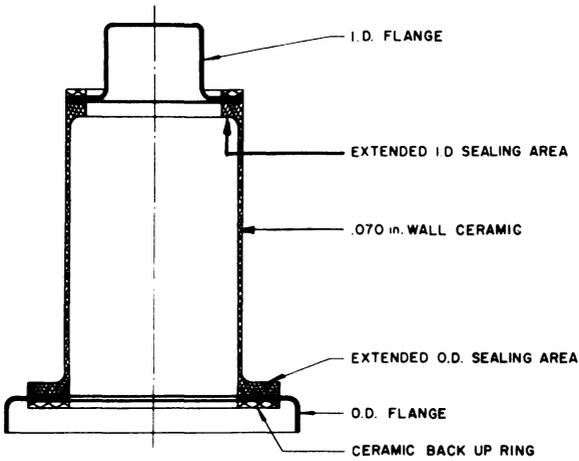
Brazed Ceramic/Metal Assembly for Turboalternator Liner
